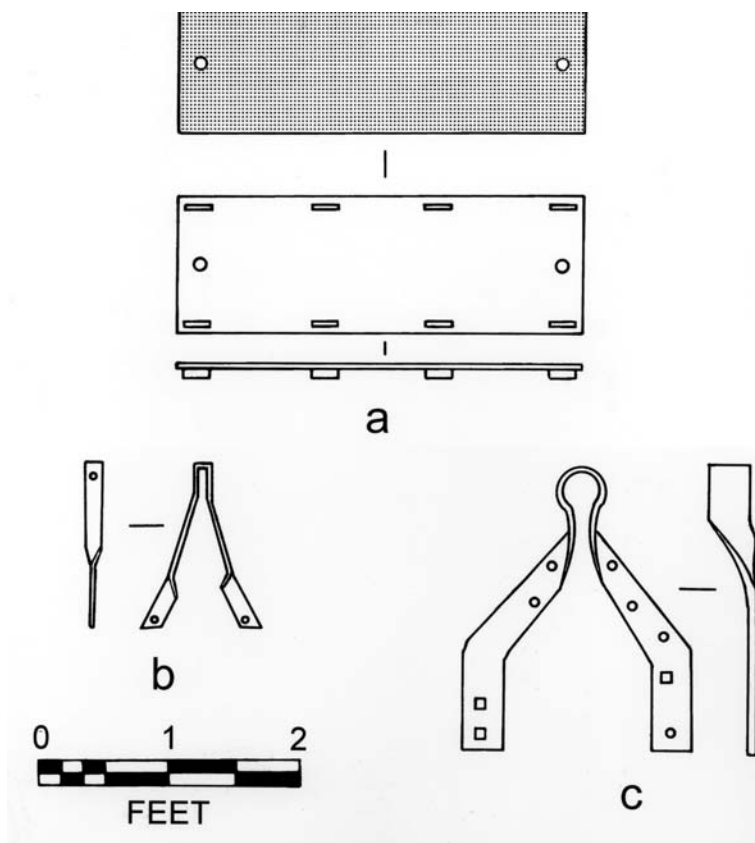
(a–c) Plan and profile views of flat metal plate (a) “V”-shaped brace (b) and boat davit brace (c). Drawing by Jim Bradford
